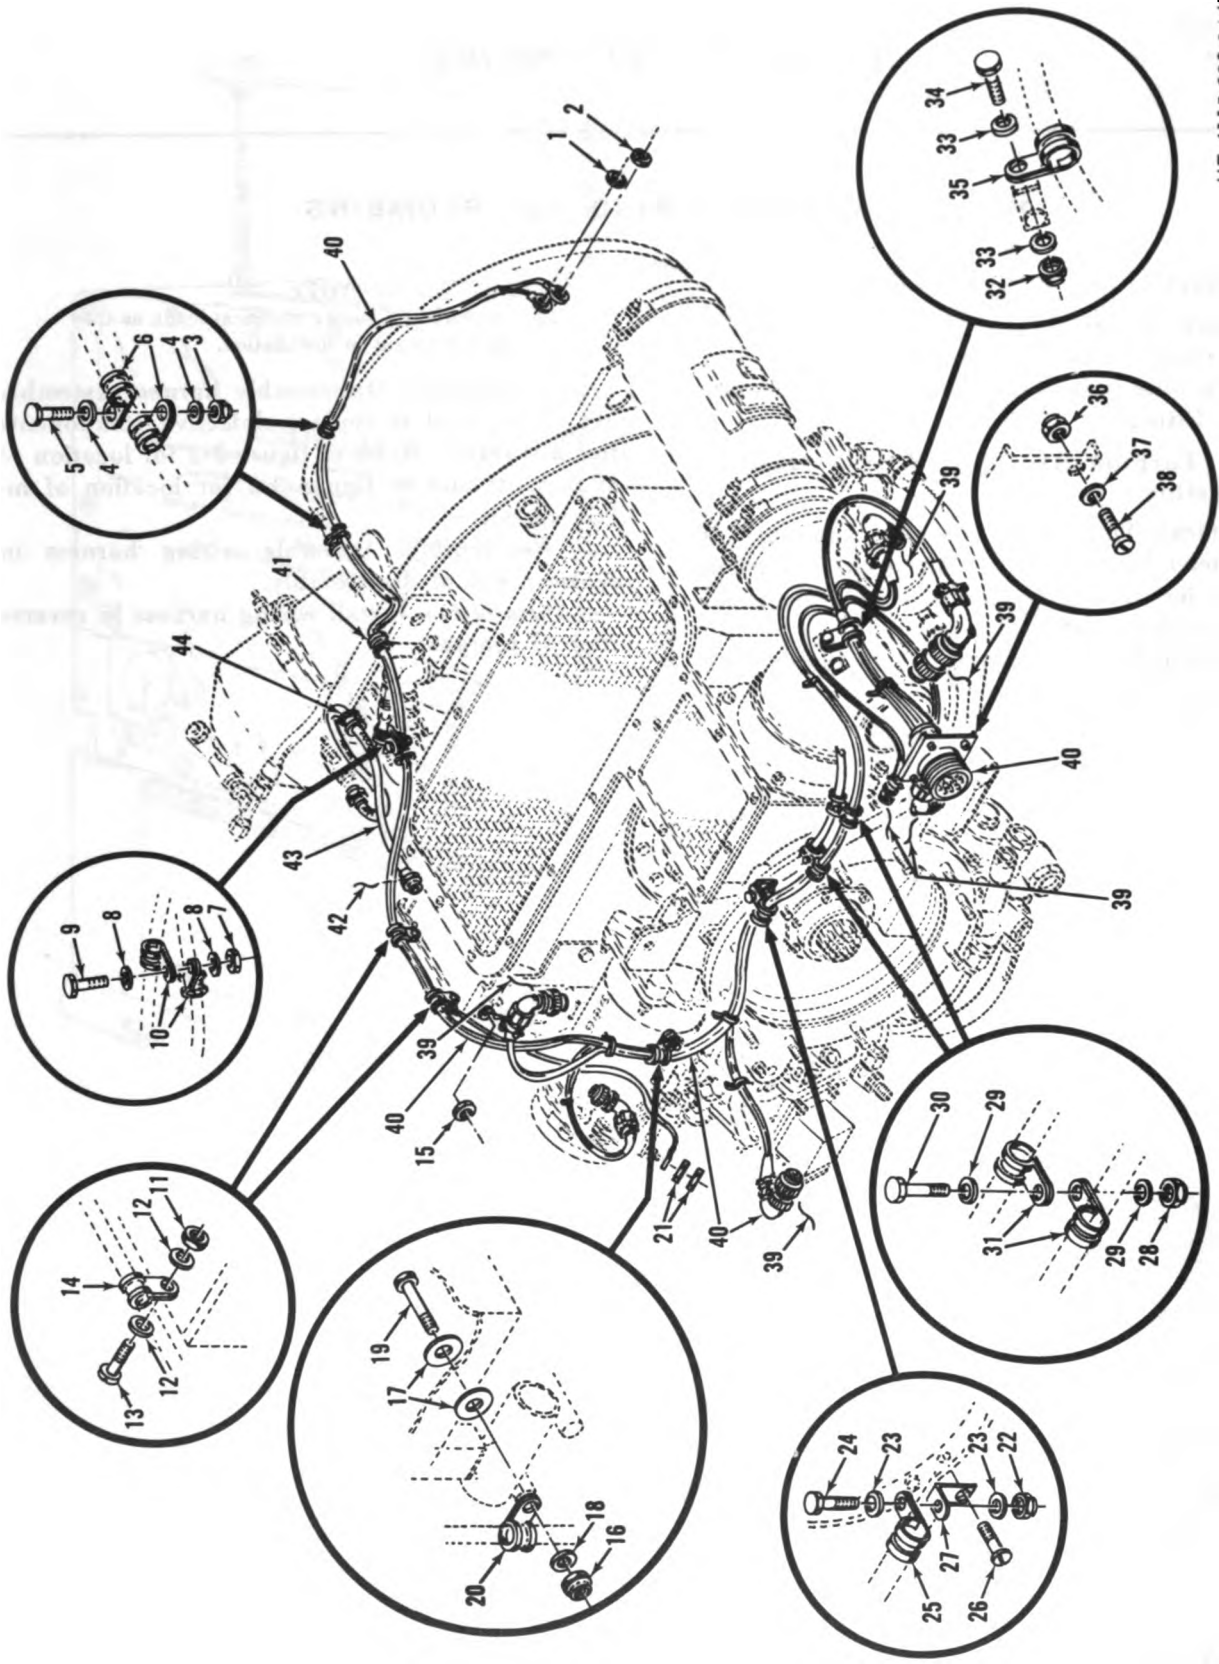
Engine branched wiring harness assembly and igniter plug electrical lead assembly, removal and installation.
